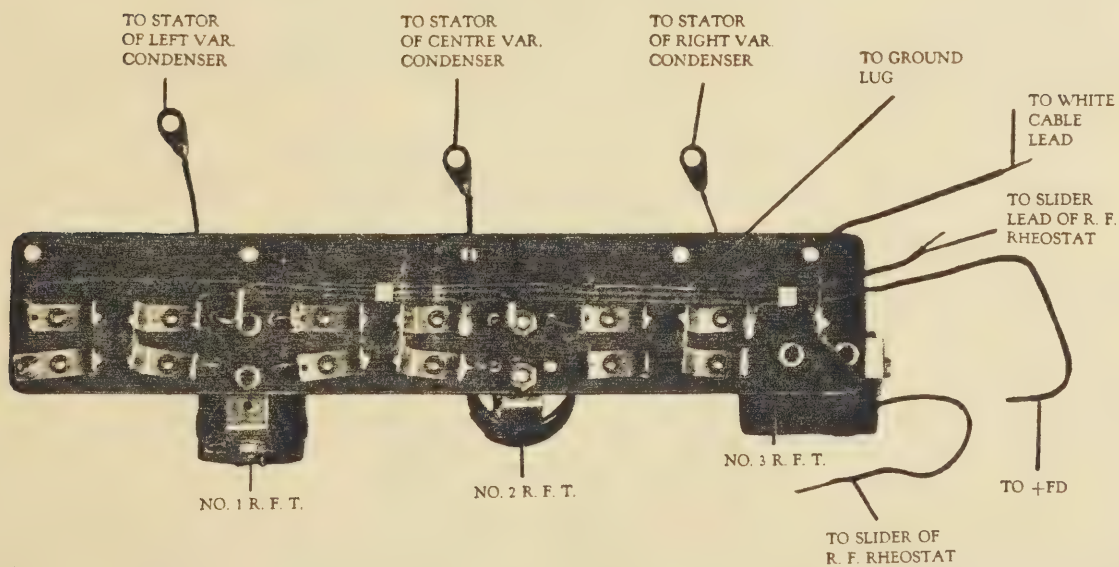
VIEW OF R.F. AMPLIFIER ASSEMBLY IN MODELS 30 (Later Type), 35 AND 48, SHOWING WHERE EACH LEAD IS TO BE CONNECTED.
